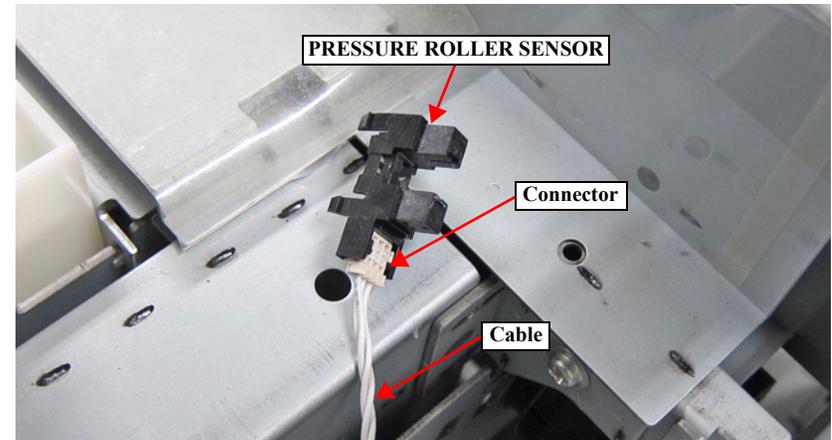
Removing the PRESSURE ROLLER SENSOR (3)
